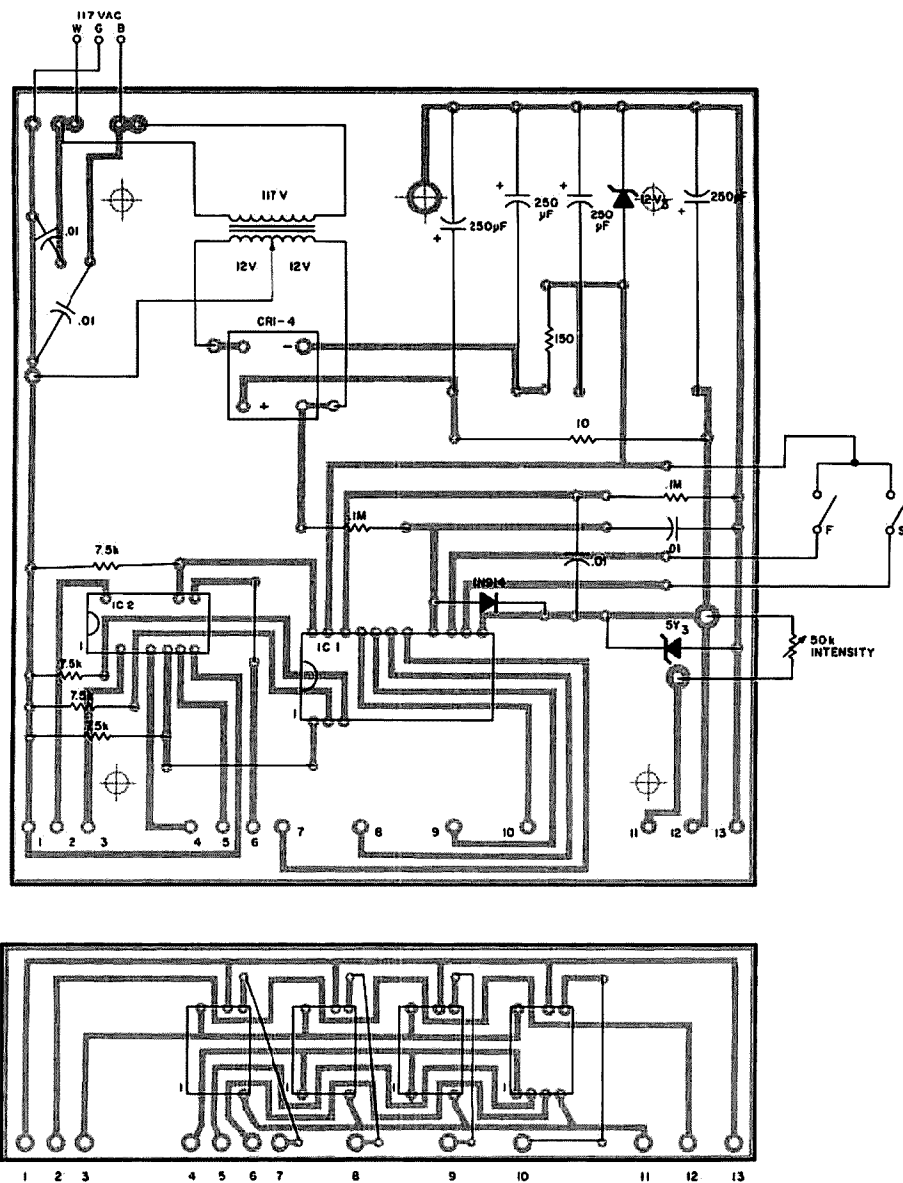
Top view of the circuit board showing parts placement, and external wiring.
